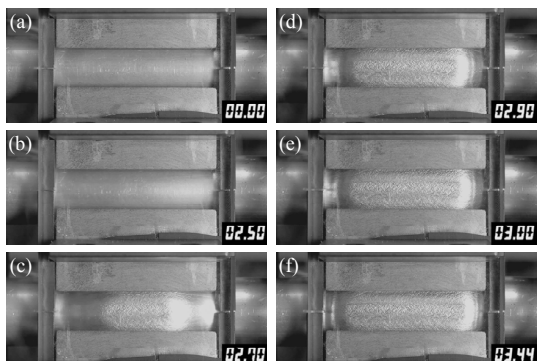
Deforming tube inside dies in gas forming without axial feeding for $J = 106 \text{ A/mm}^2$ and $t_e = 8$ s.
